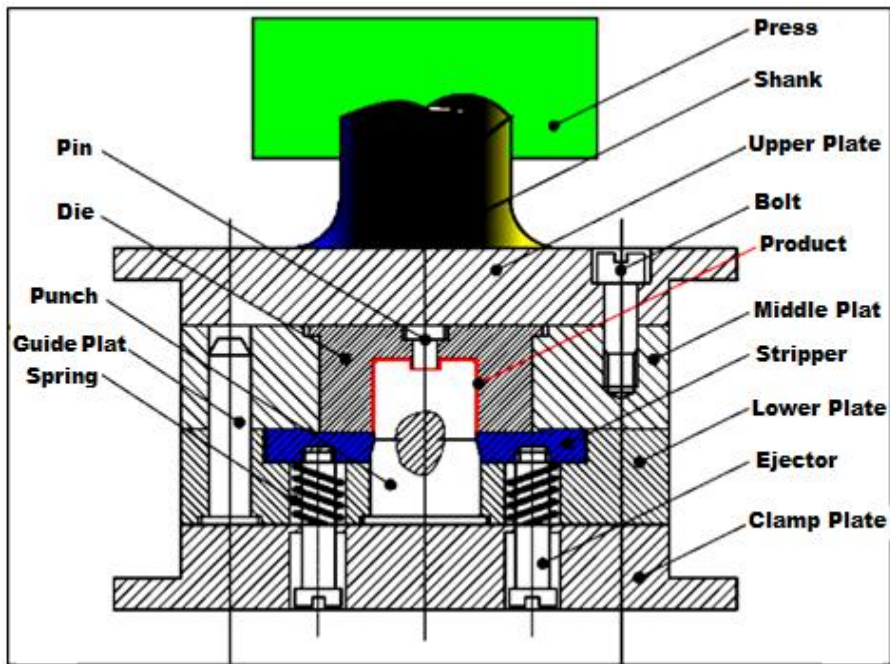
Mould assembly explain all the tool parts during the forming and drawing the product.
